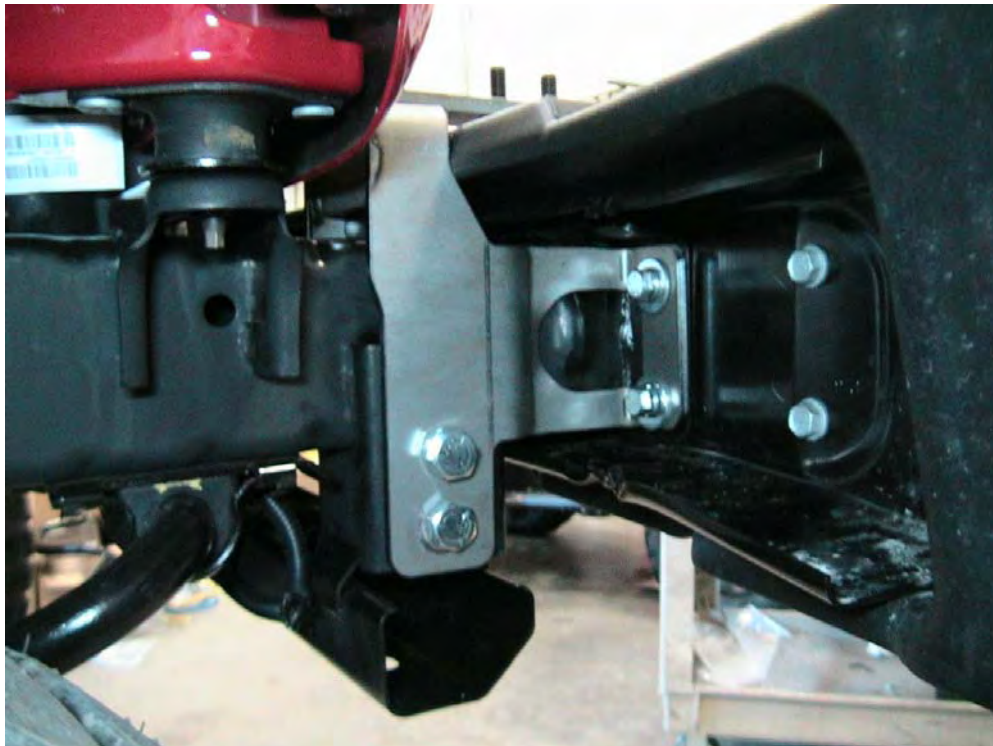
Install 7/16" Round Head bolts into frame bracket prior to installing steel bumper
